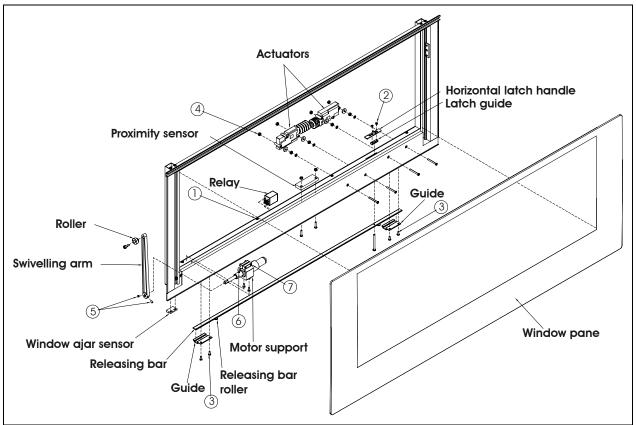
ELECTRIC AWNING WINDOW EXPLODED VIEW (SASH)
